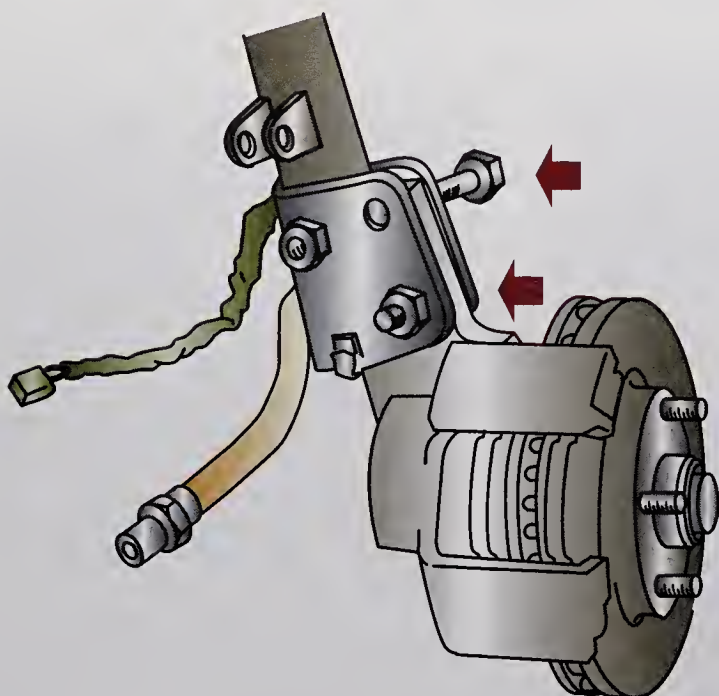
Loosening strut-to-rear spindle bolts.
